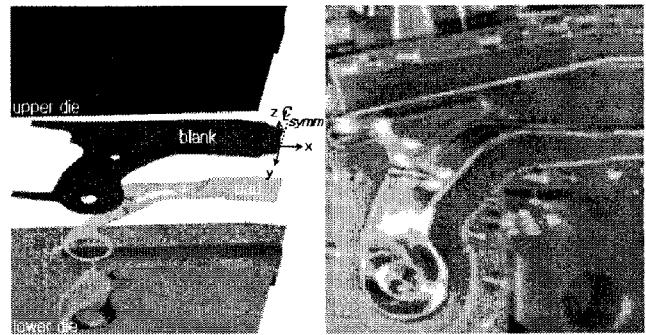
Tool setup position of finite element model and photograph of prototype tool
